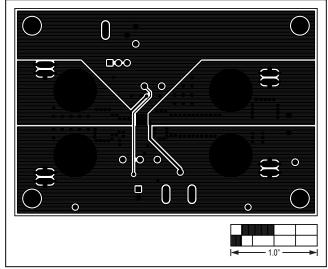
MAX15091 EV Kit PCB Layout— Layer 2 (PWR/GND)
